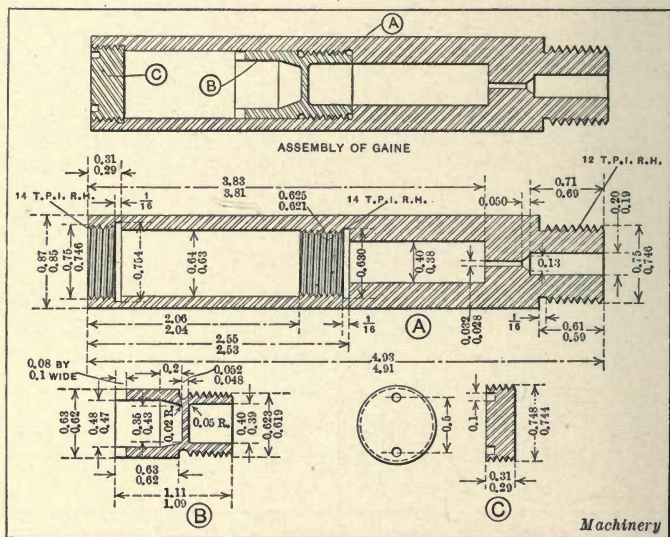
Assembly and Details of Gaine used in British No. 100 Graze High-explosive Shell Fuse
